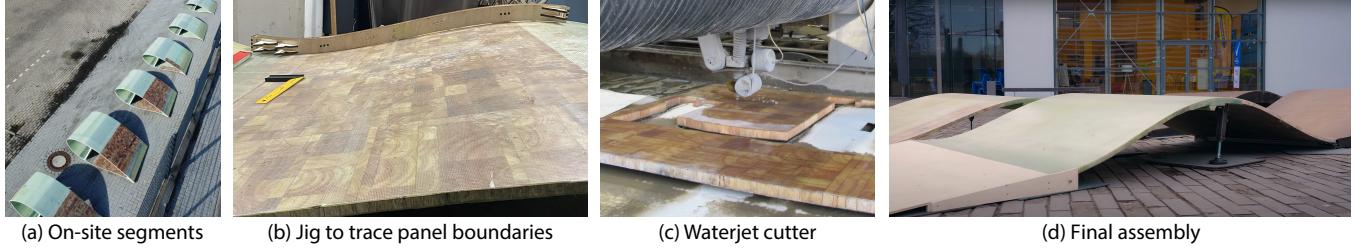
Processing the wind turbine blade: cutting into segments on site (a), marking the panel boundaries with a curved jig (b), cutting the panels with a CNC waterjet (c), placing the resulting module on a track (d). Picture (a) by ©Fraunhofer IWES.
